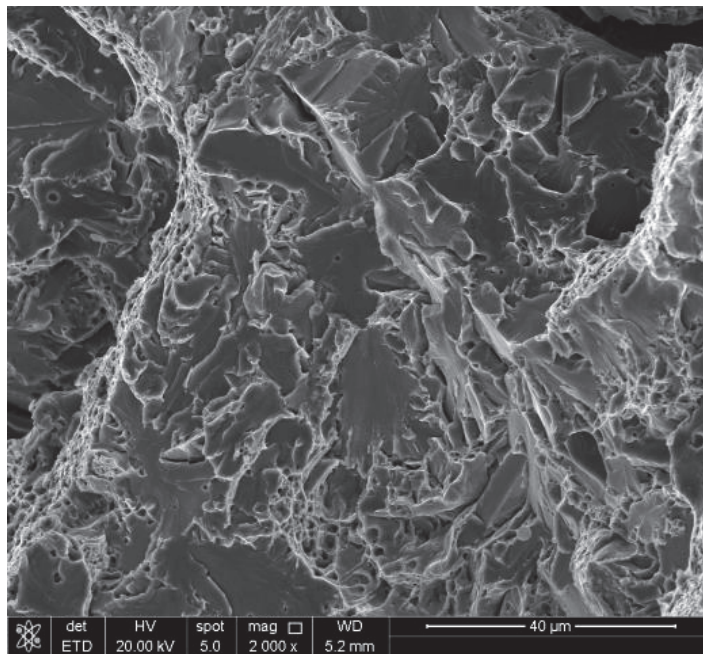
SEM fractographs of Charpy WM specimen tested at 25°C with CVN=69 J (W2 specimen).
